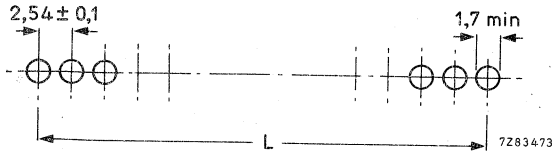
Hole pattern for single-row bottom-entry sockets; see Table 1 for dimension L.
